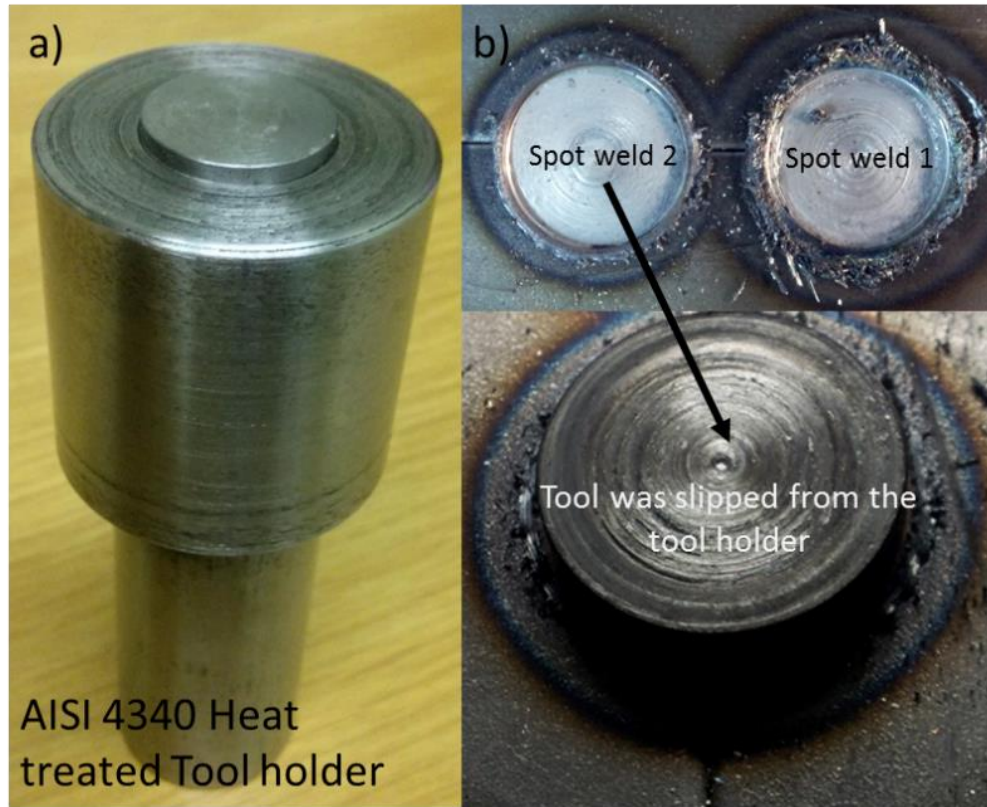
a) Tool along with tool holder b) Spot welds with overlying slipped tool.
